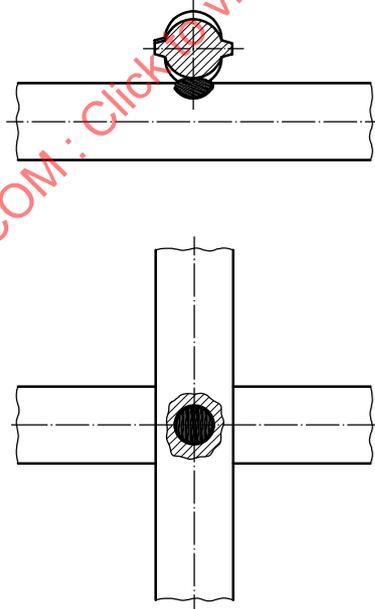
Cross joints welded by welding processes 21 and 23
